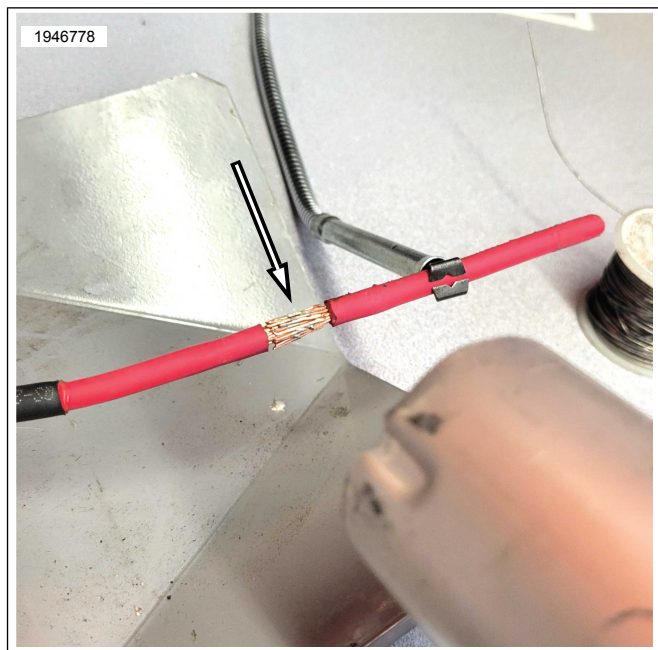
Prep 4: Preheat Wire and Solder with Heat Gun
